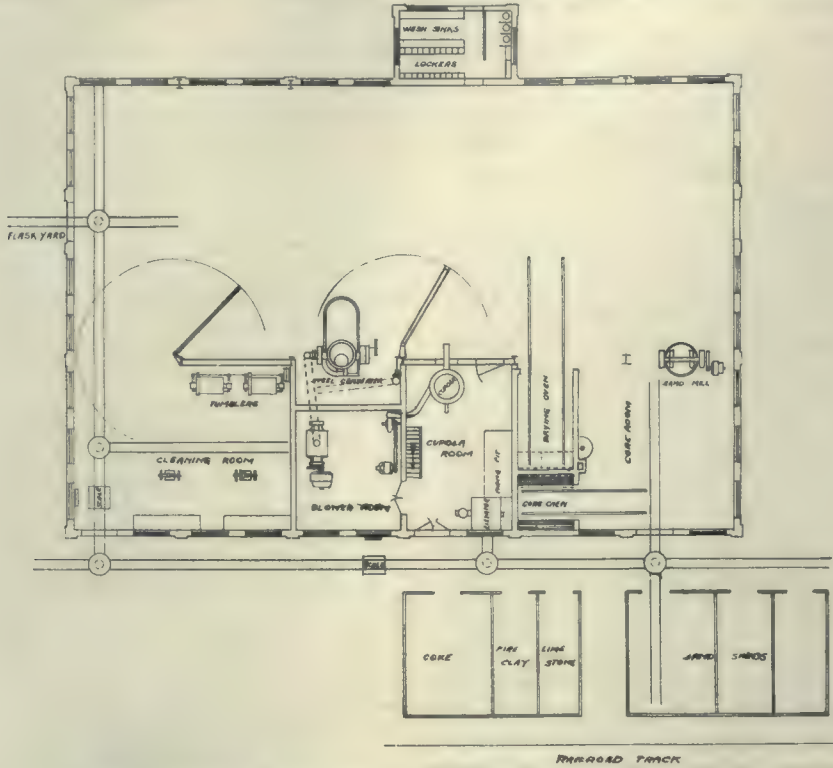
Layout of Steel Plant. Vancouver Engineering Works.
